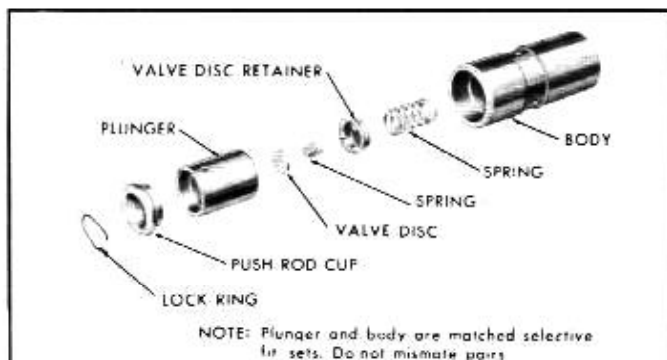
C-121—Disassembled Hydraulic Tappet Assembly
